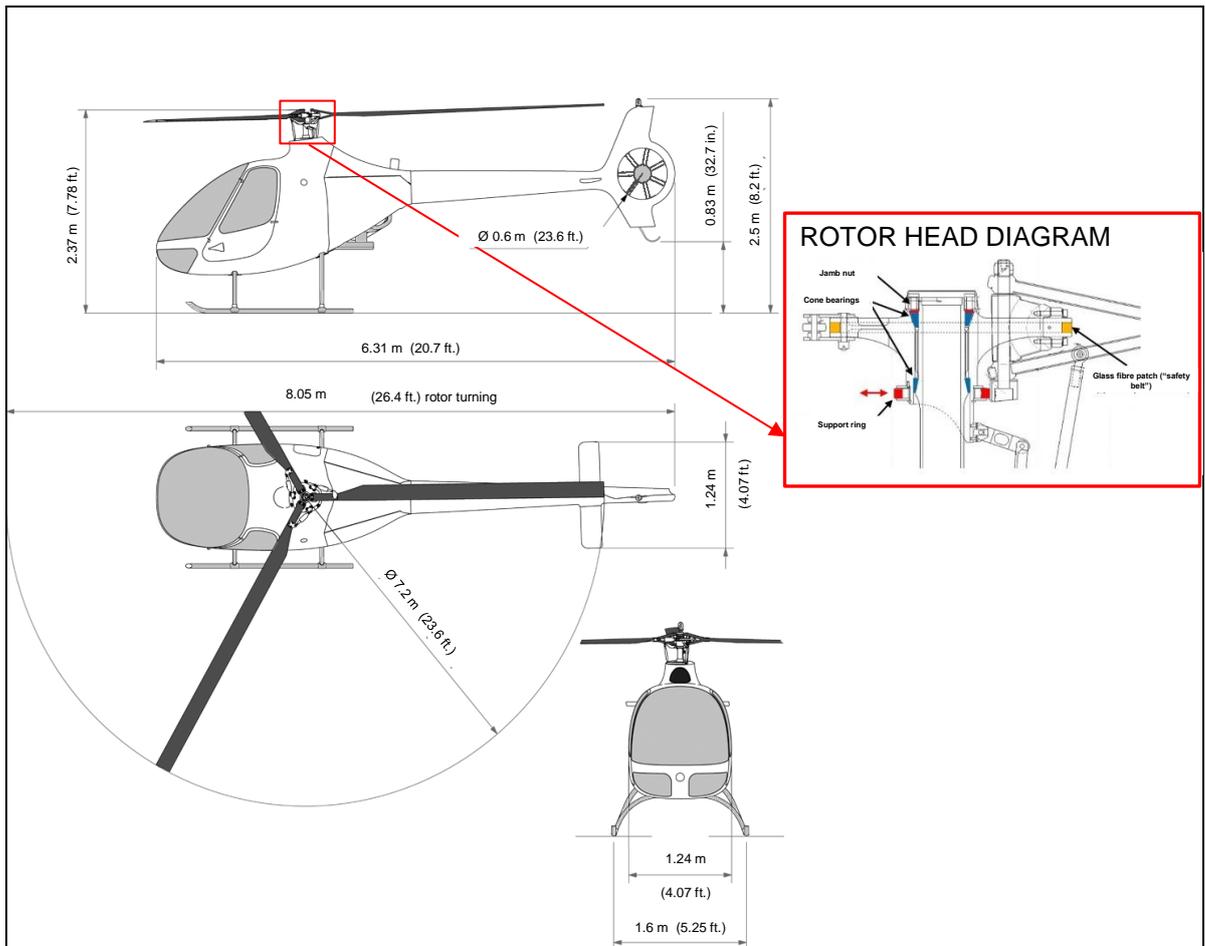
Three-view drawing of the helicopter and the main rotor head diagram [source: Helicopters Guimbal]
